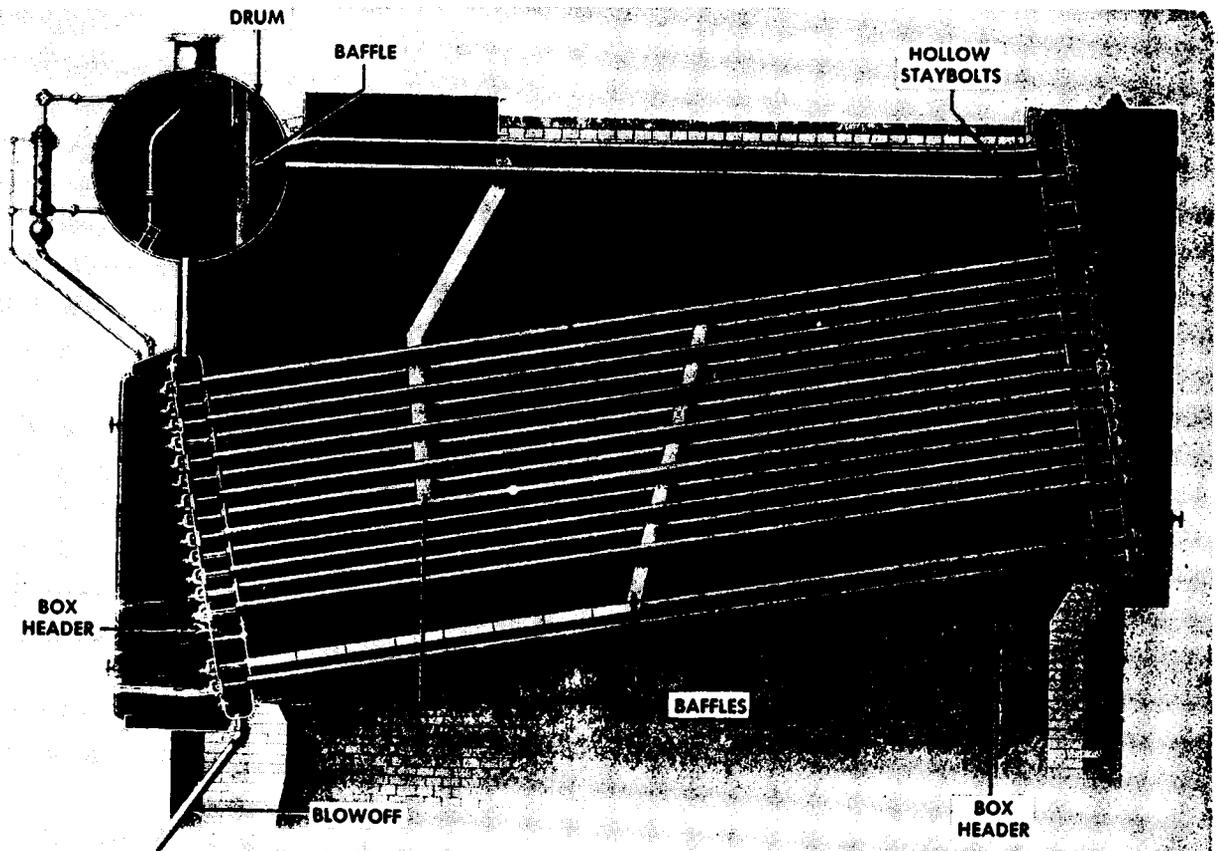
Cross Section of a Box Header Cross-Drum Boiler
